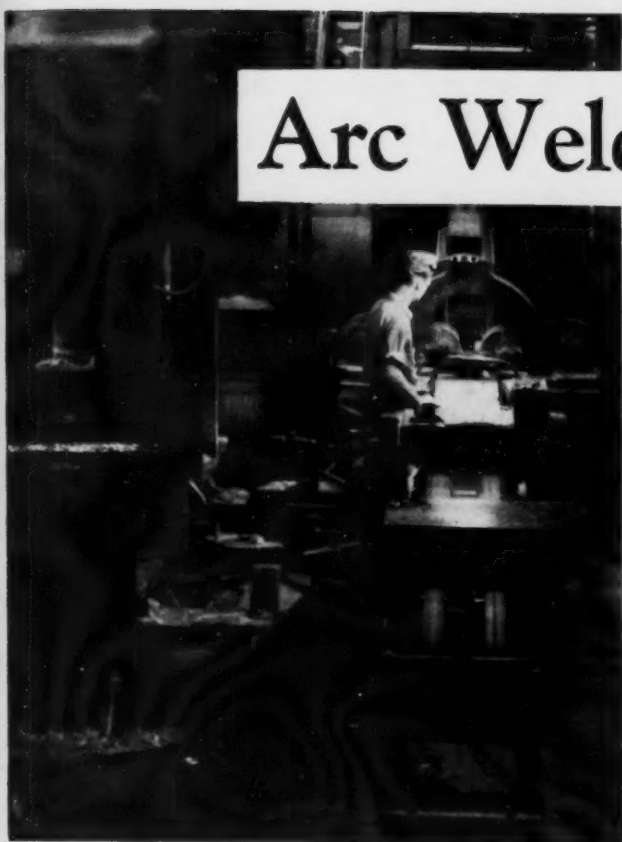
Front end of electrode extrusion line showing part view of the extrusion press (on left) and also motor-driven rotary stripper for cleaning holder end of electrode. Conveyor runs into drying oven in background.
